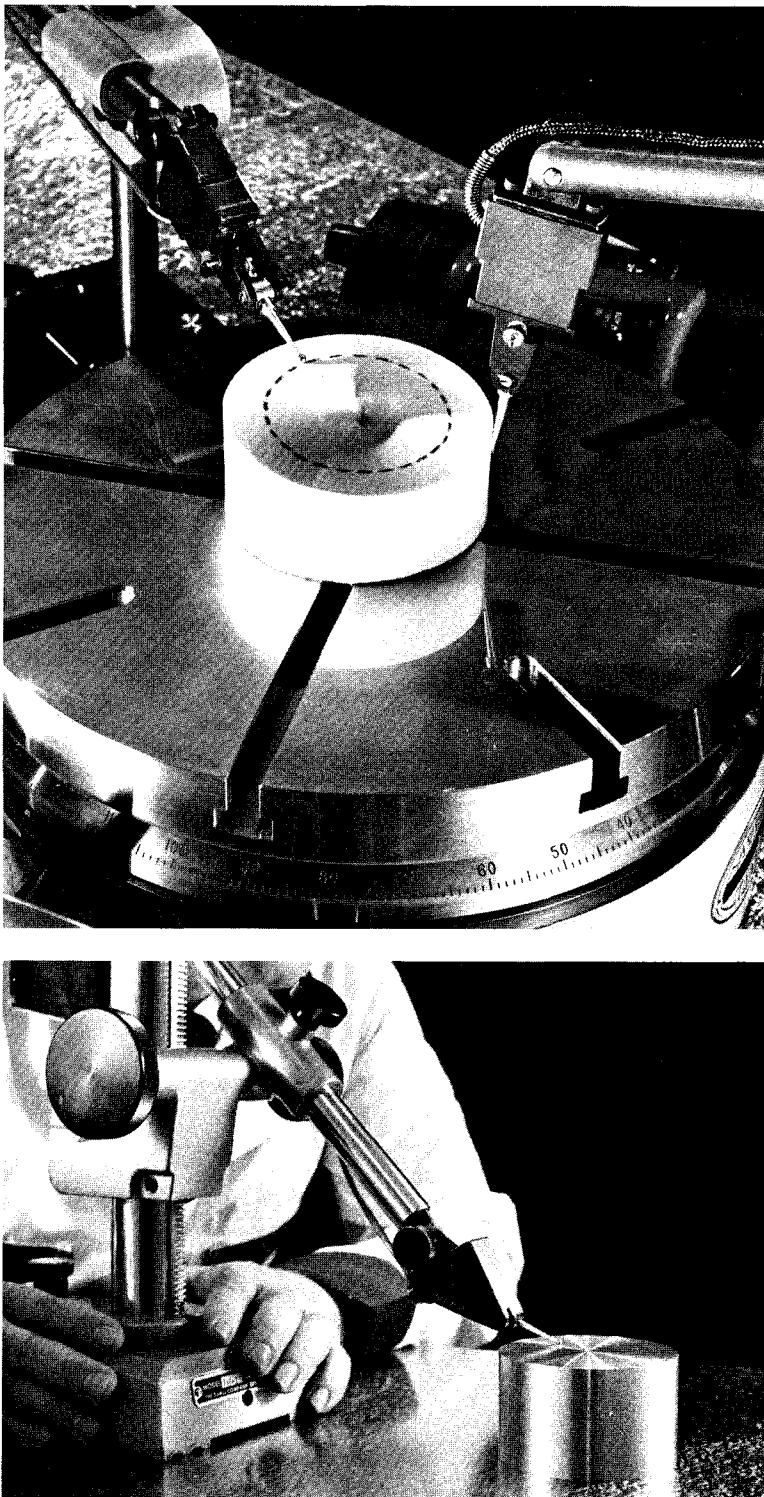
Flatness may be inspected separately from roundness by means of a surface plate, indicator and stand. When inspecting circular parts, however, as with this aluminum lathe-turned piece, other geometric features are not clearly related.
